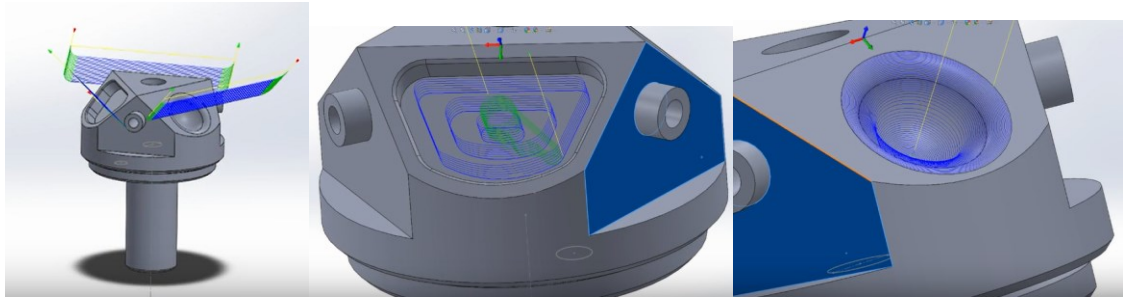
3 Facing Passes, Milling Flat Pocket, Spiral Finish Cut for Spherical Hole
